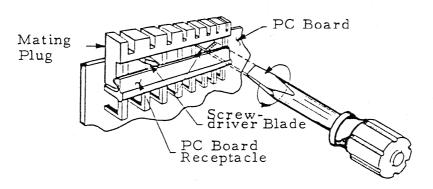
MODULE CONNECTOR REMOVAL
